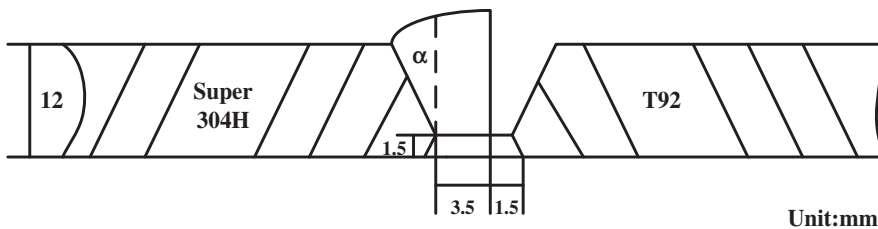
Schematic diagram of T92/Super 304H dissimilar weld joints.
